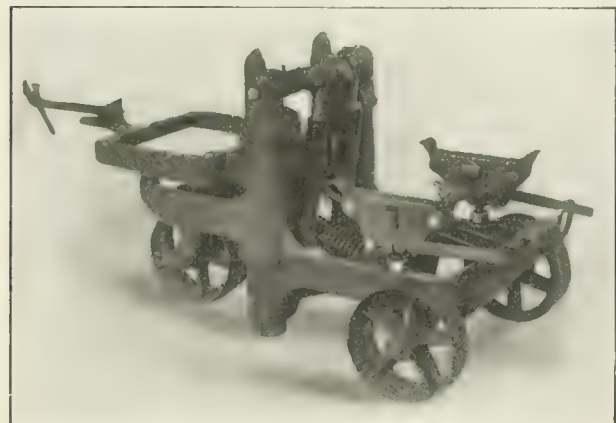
The Turn-Over Molding Machine Built by the International Molding Machine Company, Chicago, Ill.
